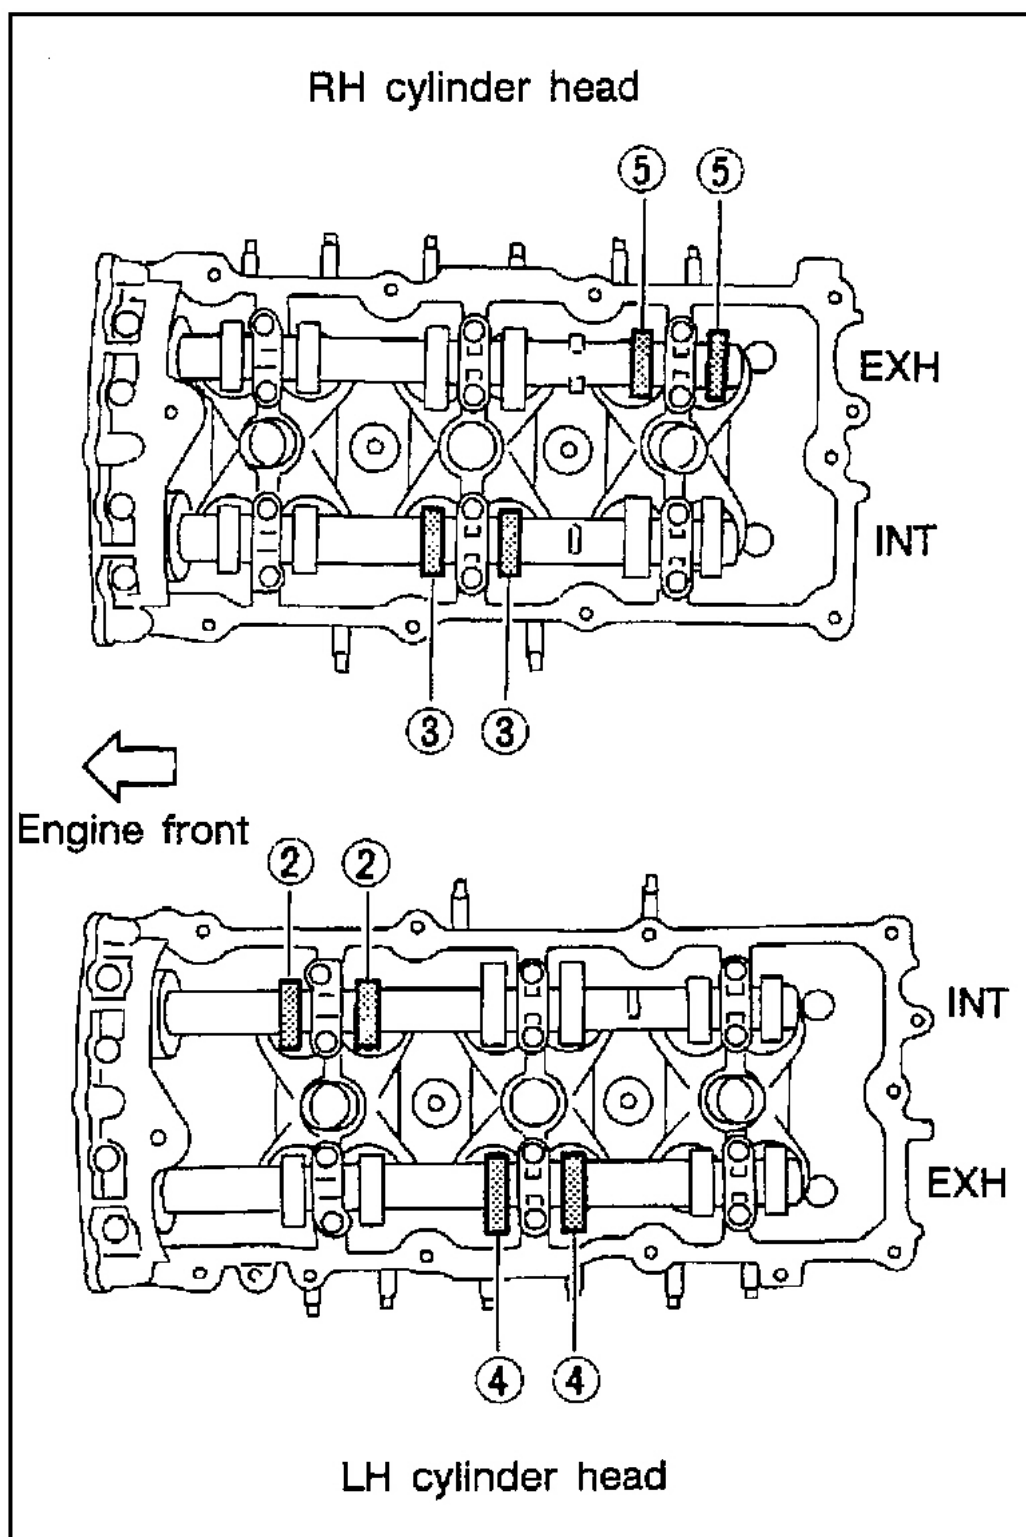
Measuring Clearance Between Valve Lifter And Camshaft
